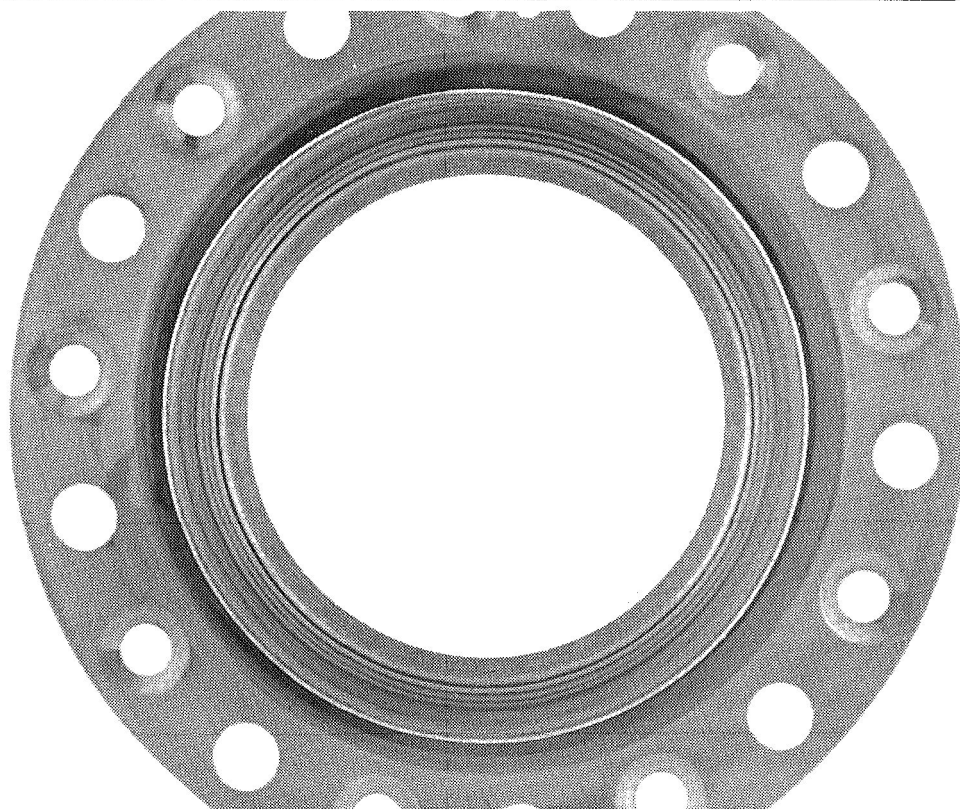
1 Valve Seat (Front View) After Task III Testing
